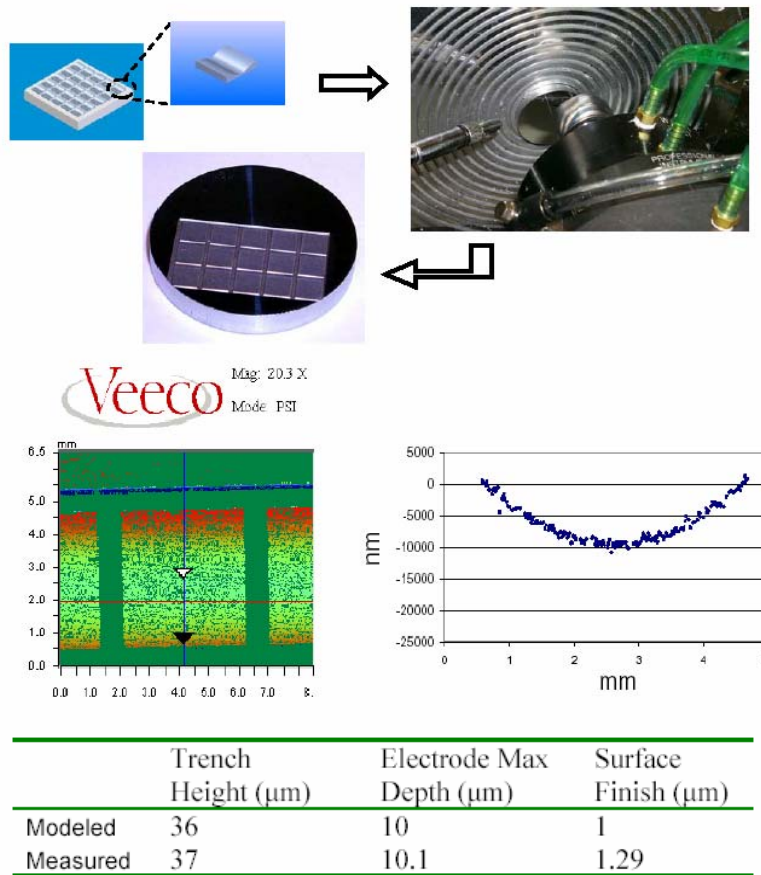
3D electrode machined on a aluminum substrate. Prototype fabrication using carbide tools provided the information needed to machine thin layers of EN using a milling tool.
